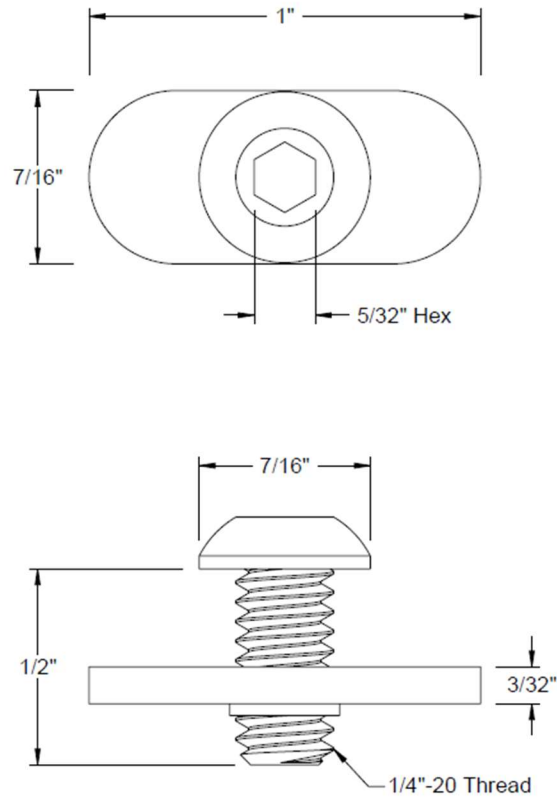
Part 50-0013 Drawing – T Slot Fastener
